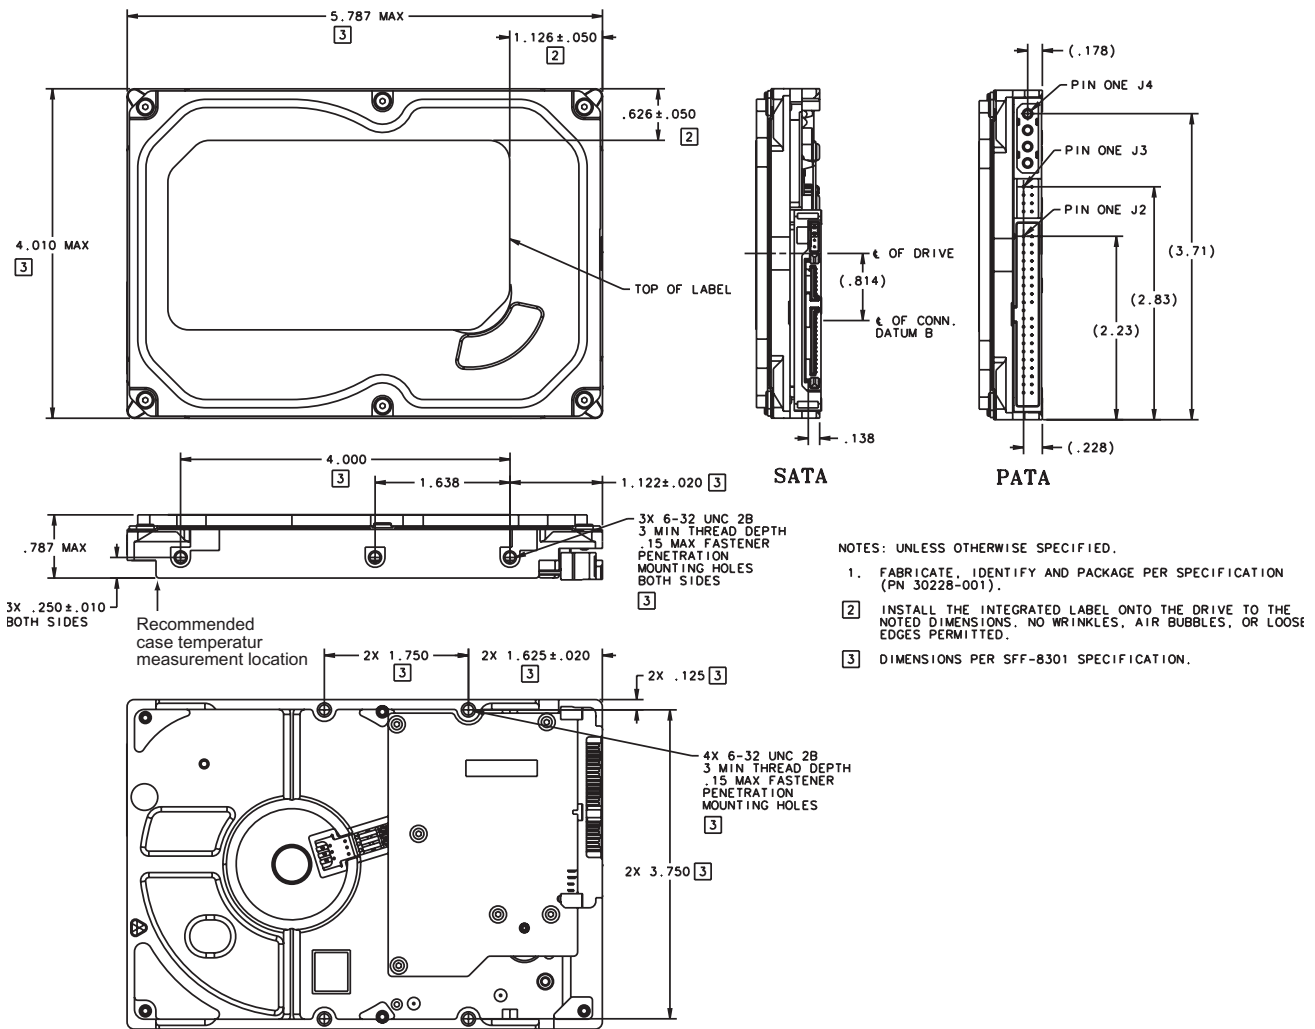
Mounting dimensions for PATA/SATA drives —top, side and end view
